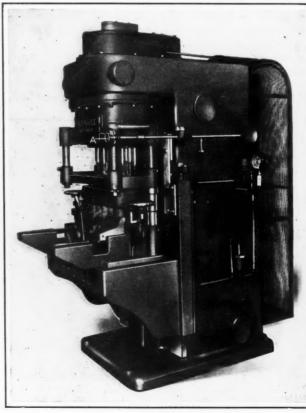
Multiple-spindle Drilling Machine in which the Knee is fed to the Spindles through the Use of an Oilgear Pump
